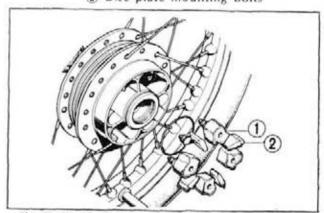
① R. rear wheel damper ② L. rear wheel damber
